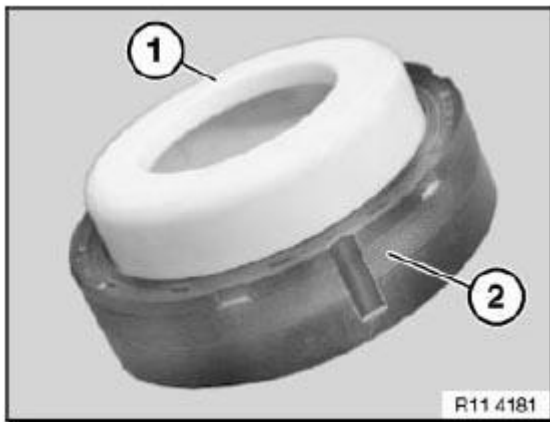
Identifying Support Bushing And Crankshaft Radial Seal
